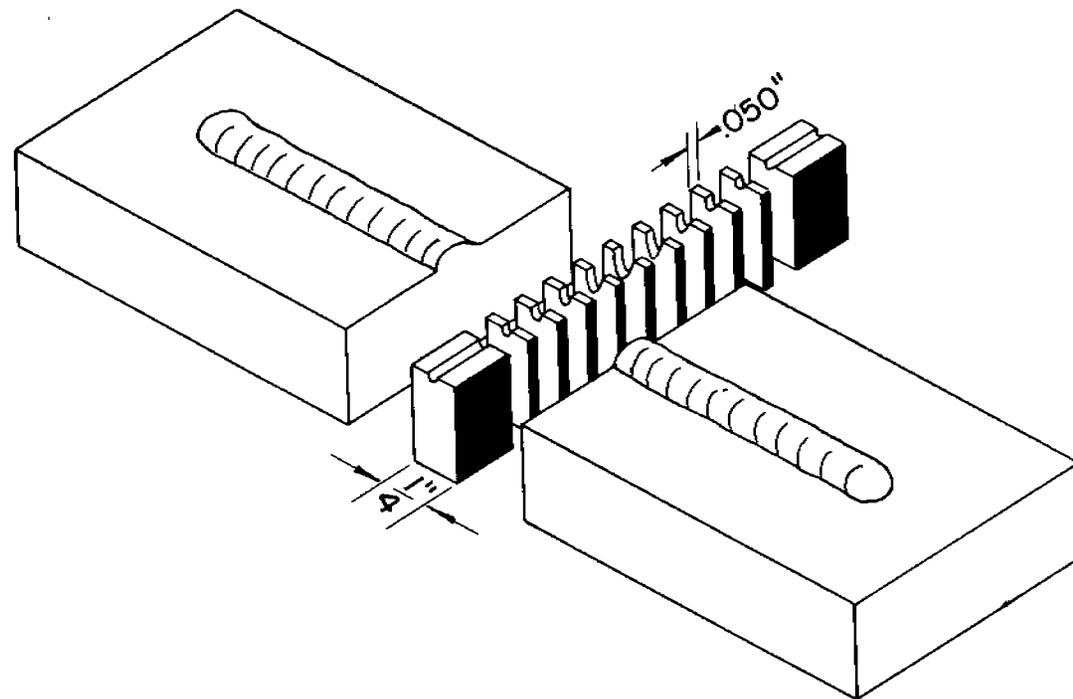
CUTTING AND SECTIONING DETAILS FOR WELDED KINZEL-TYPE SPECIMENS
